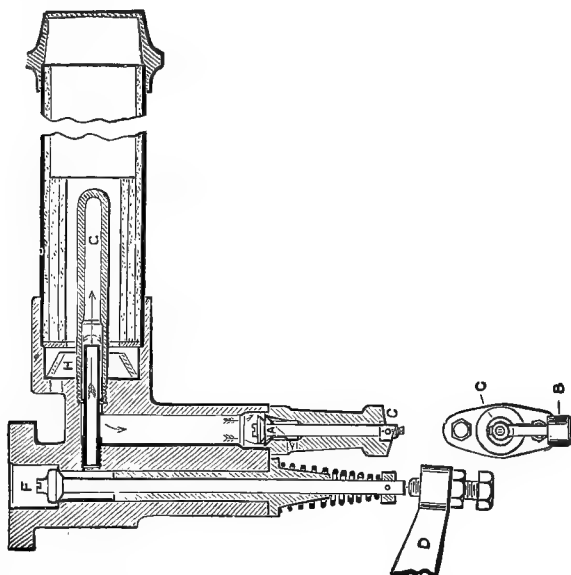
Stockport Otto Engine (section incandescent tube and starter)
